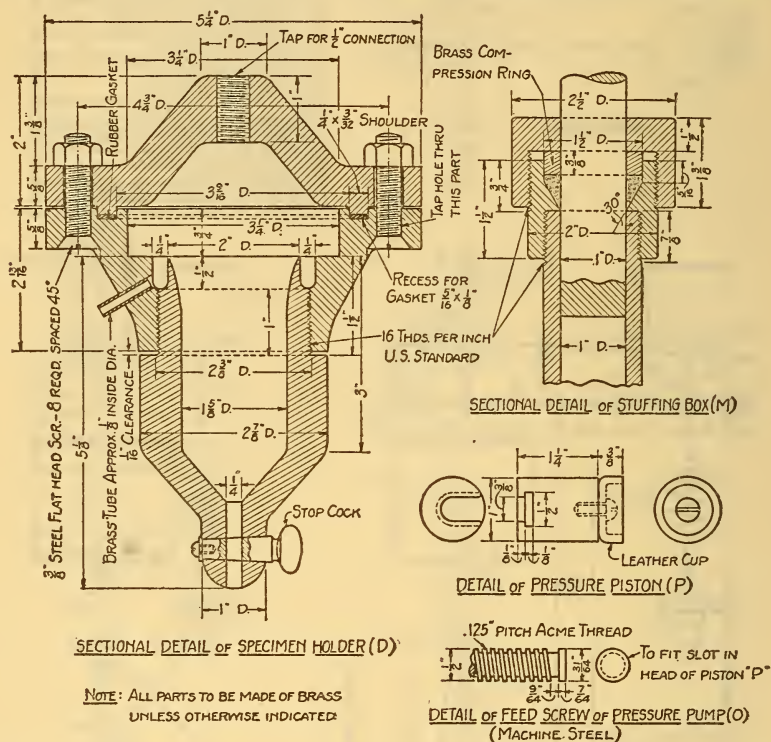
Transverse sections of specimen holder and parts of the accumulator
